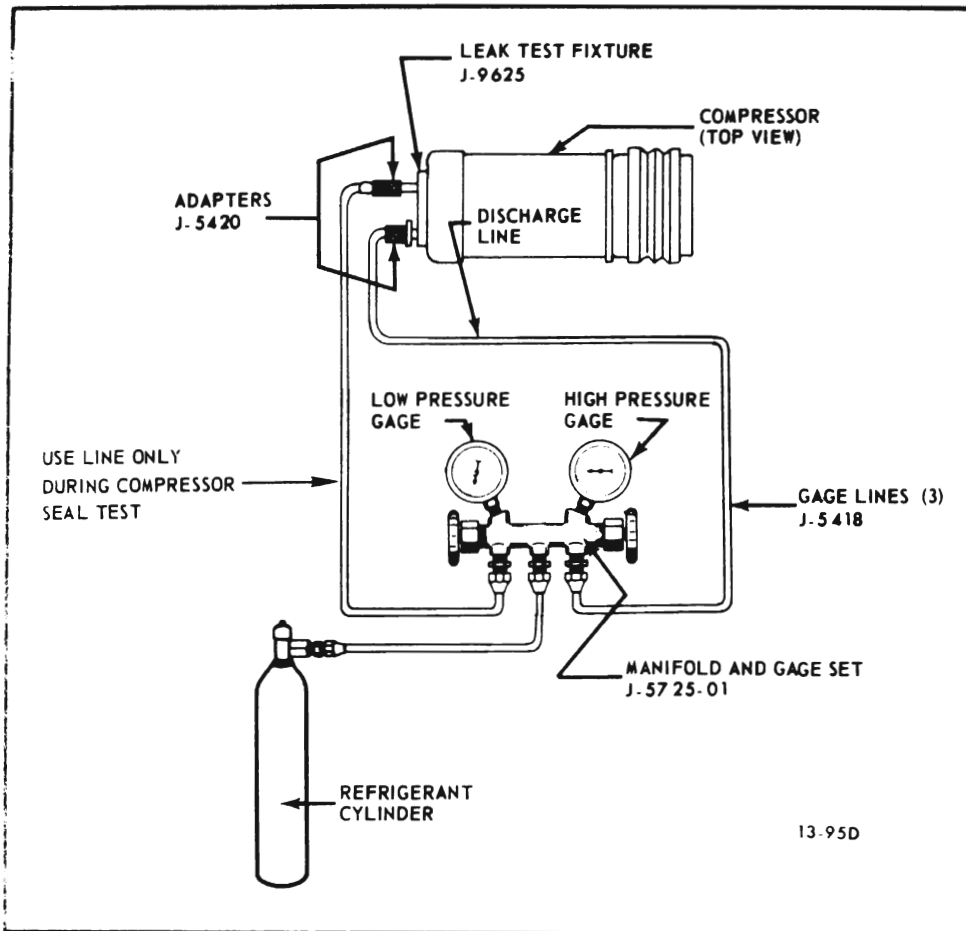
Leak Testing Shaft Seal and Seal Seat "O" Ring
